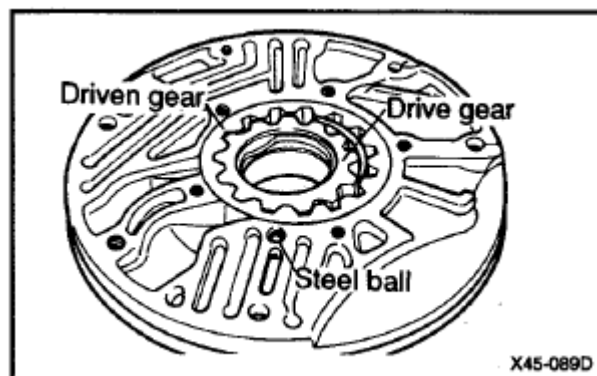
Identifying Oil Pump Drive, Driven Gear, & Steel Ball
